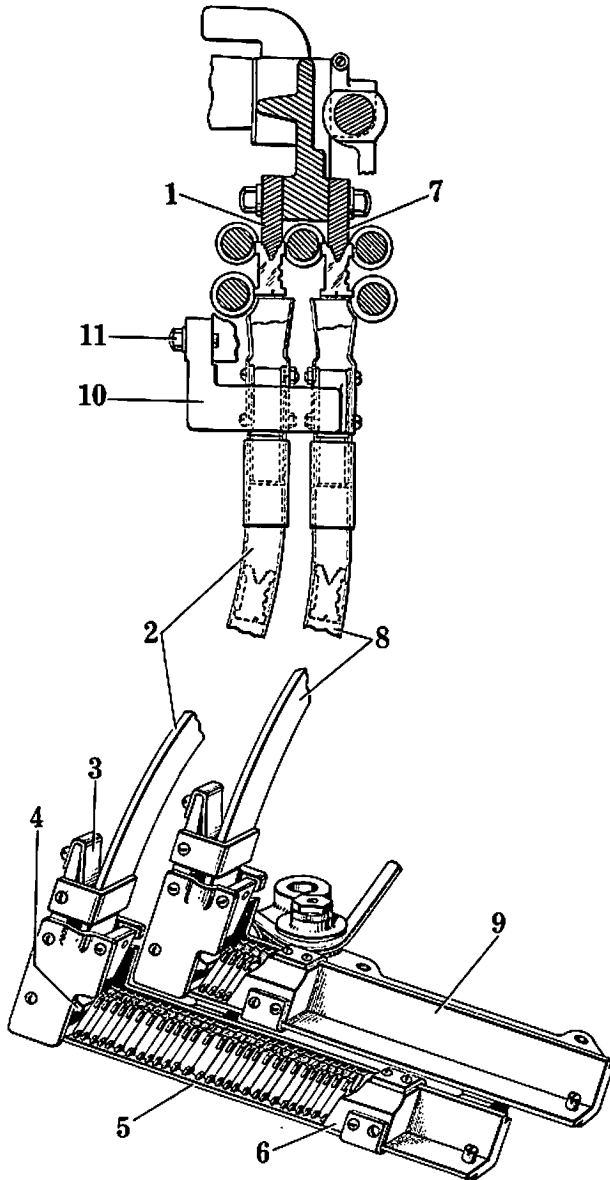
Double Distributor Pi Stacker. Pi matrices from the front distributor bar 1 enter the front tube 2 and assemble on the lower frame 5. Pi matrices from the back distributor bar 7 pass through tube 8 and assemble on the upper frame 9.
